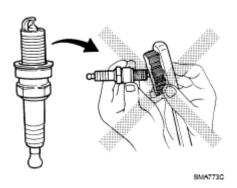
Caution For Using Wire Brush For Spark Plug Cleaning Courtesy of NISSAN MOTOR CO., U.S.A.
